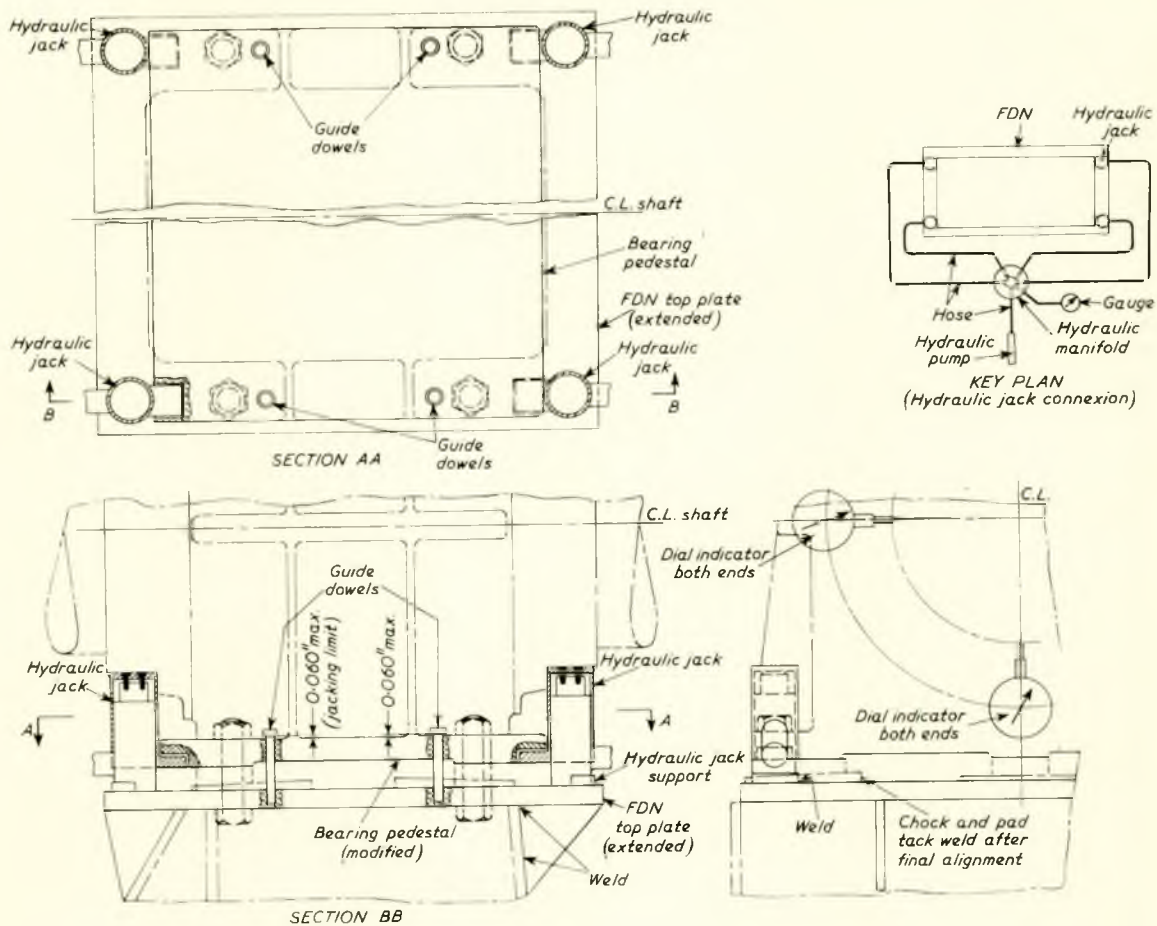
Integral load test jacks for steady bearing (permanent installation)
